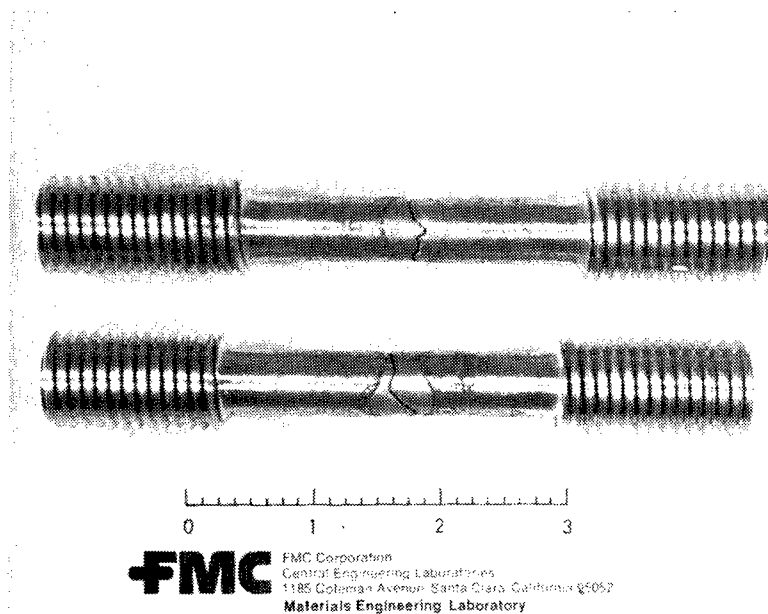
Tensile Test Specimen Aluminum Weldment A206.
